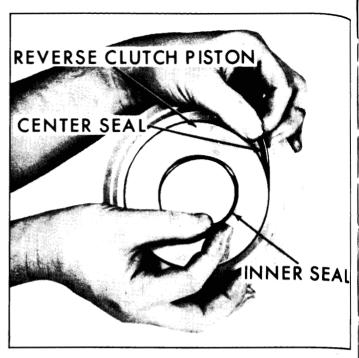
Removing Low and Reverse Clutch Piston Center and Inner Seal
